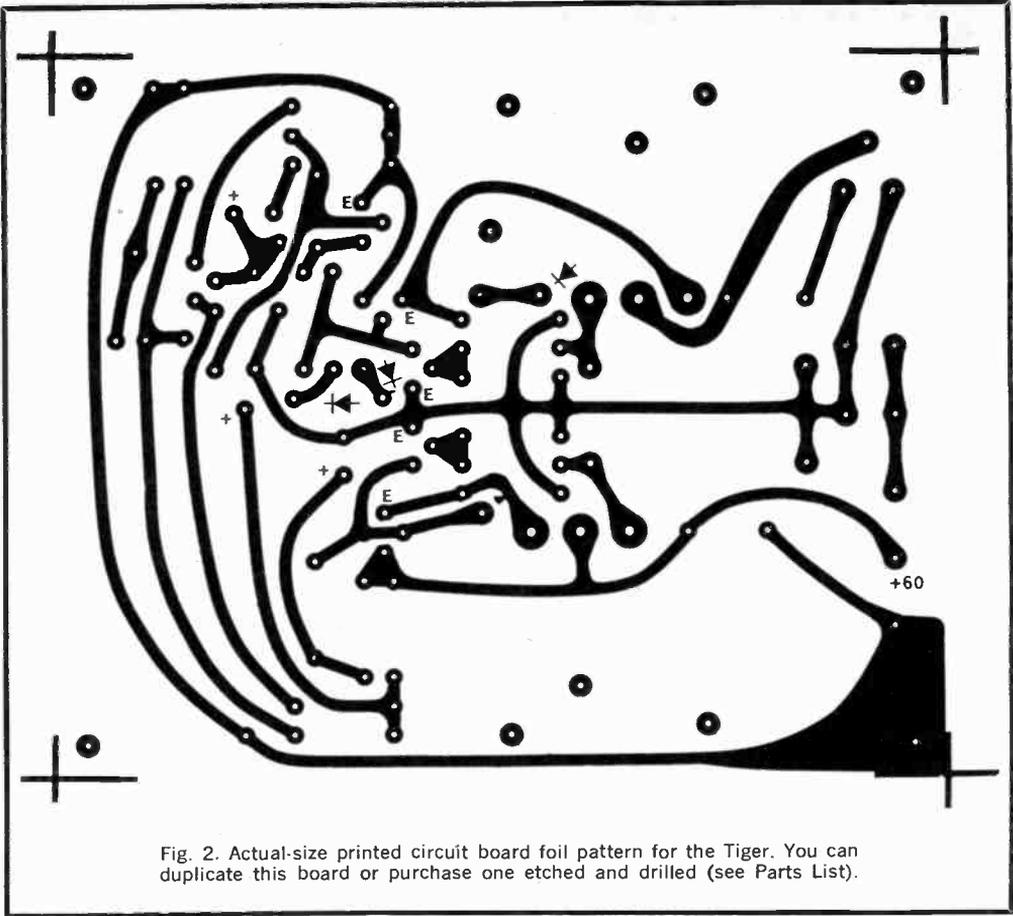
Actual-size printed circuit board foil pattern for the Tiger. You can duplicate this board or purchase one etched and drilled (see Parts List).
